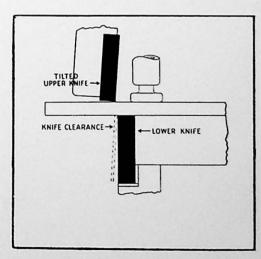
Why Cincinnati Shears can use straight sided knives and also cut a square edge with full clearance between Knives
